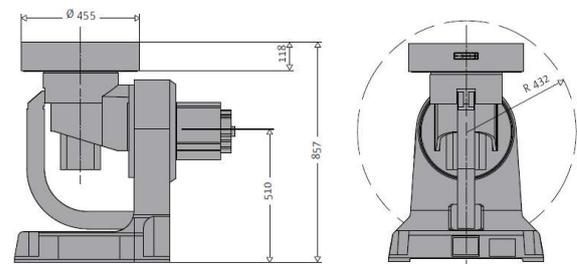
Overall dimensions and workspace DKP-400, two-axis positioning unit [10].
